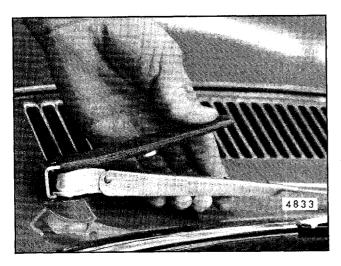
Wiper Arm Removal Tool J-8966 (or Equivalent)
